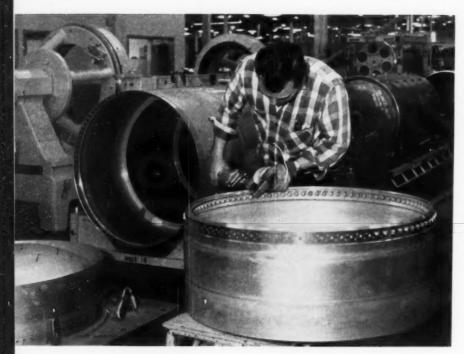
Nut Plates Are Riveted to Forward Head Assembly of "B" Model Bomarc Ramjet Fuel Tank. This mechanical joint permits installation and inspection of a rubber fuel-displacing bladder. Aft section of the tank, to which the head will be bolted, is at the operator's right
